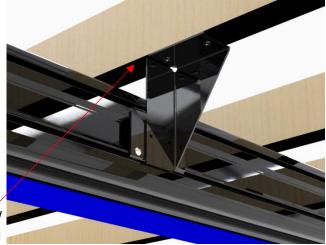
Cabaret case extrusion hanging off of ceiling mount
